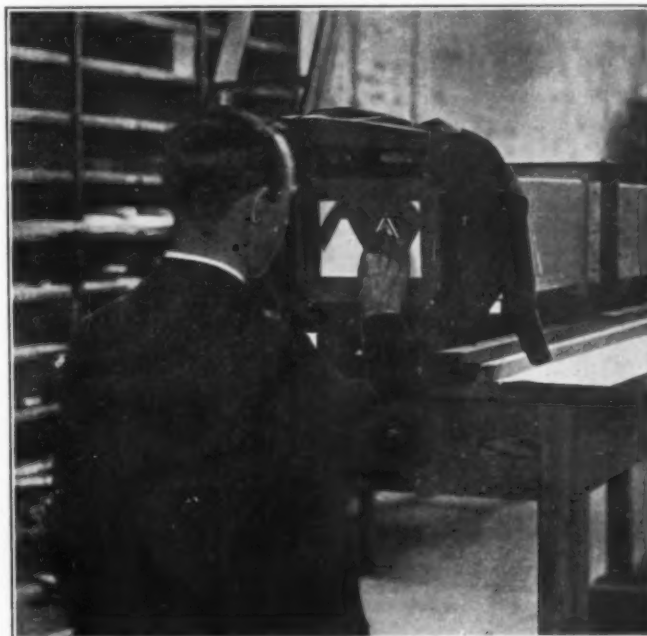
PROJECTION MACHINE FOR CHECKING CONTOUR OF THREAD
